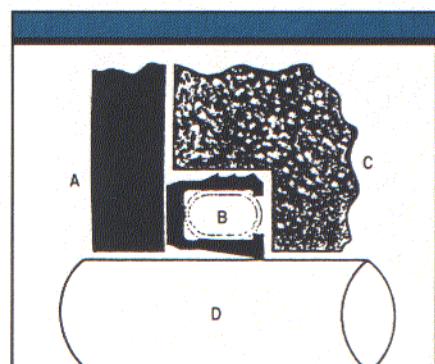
Cross-sectional view of the pump head. Liquid end of the pump is to the right. Legend: A = backup washer, B = piston seal, C = pump head, D = piston. (Reprinted with permission from reference 2, courtesy of Bal Seal Engineering.)
